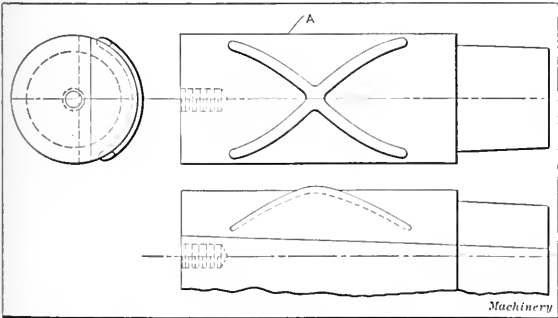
Mandrel for babbitting Bearings with Crossed Oil Grooves
